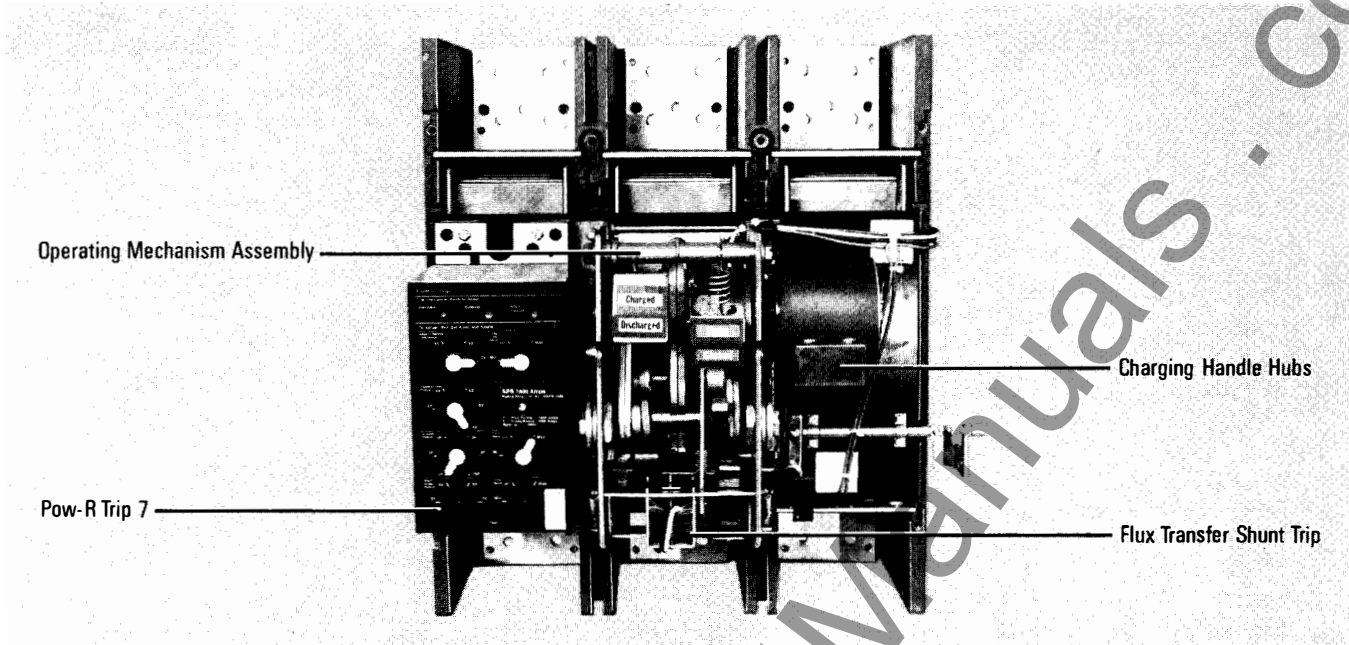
1600 Amp Breaker With Front Cover Removed.
